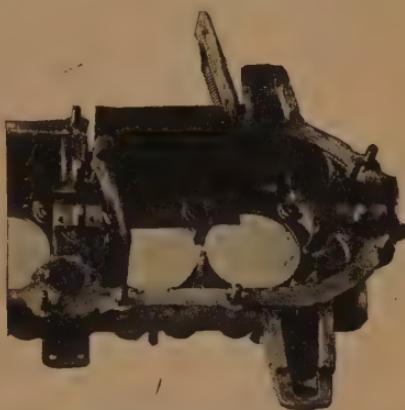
Sheet-Iron Form to Back Up Section to Be Welded-In
